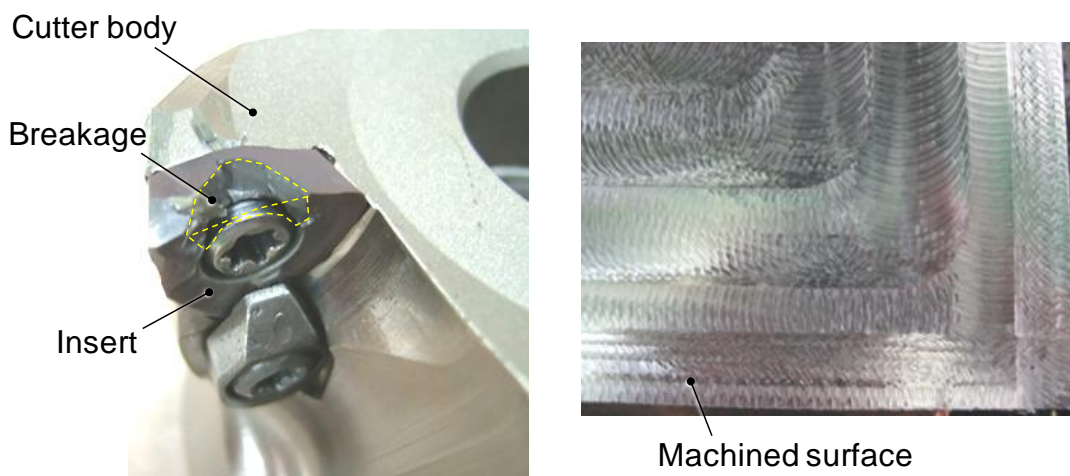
13 Damage of a long cutting tool and deterioration of the machined surface due to chatter vibration.
